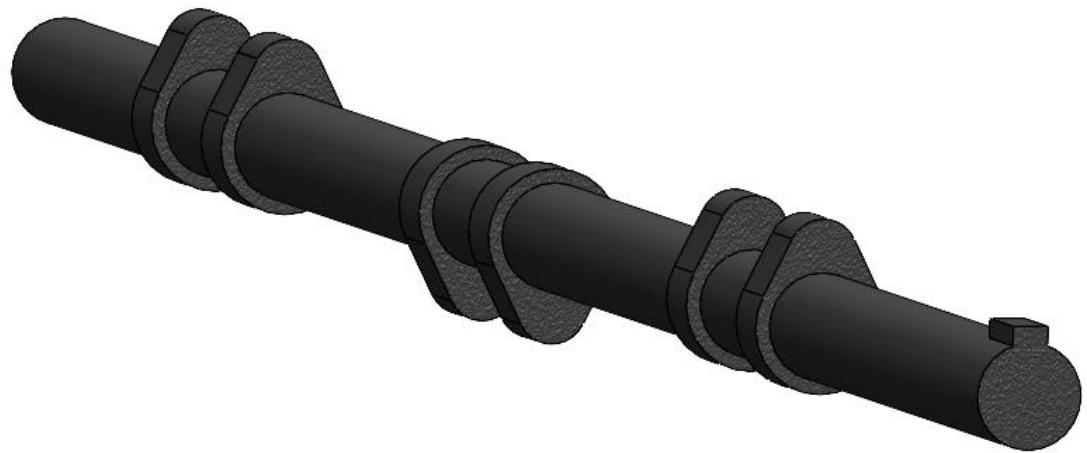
Camshaft CAD design with 180 degree of intake valves open- closed movement.
